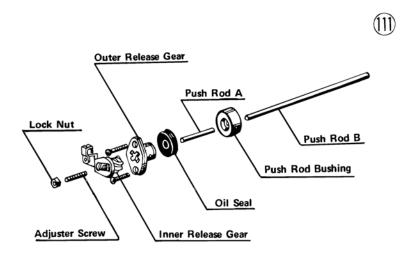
is a breakdown diagram of the H1 clutch release mechanism. The toothed portions of the inner and outer clutch release gears are made of nylon. The inside of the inner release gear is partially threaded and an adjusting screw is screwed into it. The end of the screw transfers motion to push rod A, which is inserted into the opposite end of the inner release gear, and extends into the drive shaft. This rod in turn moves push rod B and the clutch spring plate pusher, also inside the drive shaft.
